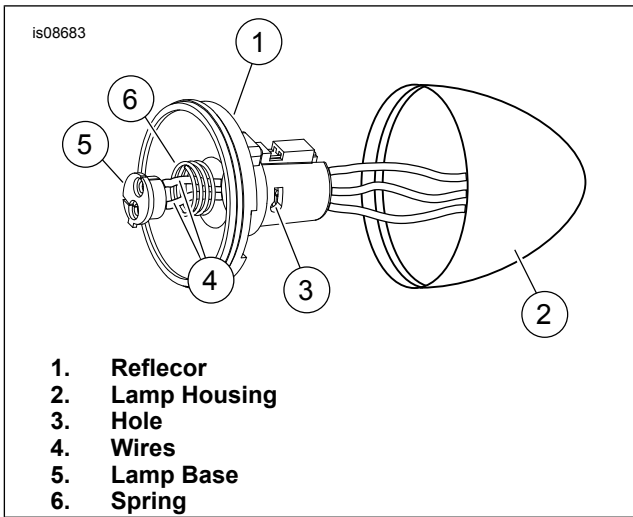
Socket, Lamp Housing, Wires, Lamp Terminal Base and Spring
